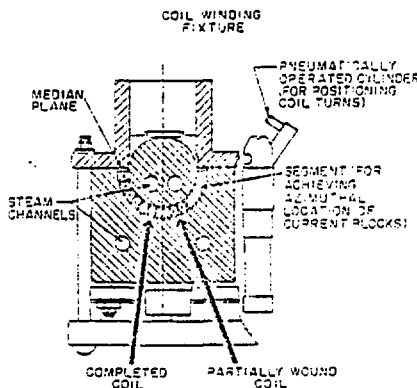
This is an end-view drawing (axial) of the steam heated, hydraulically loaded iron winding fixture used for the ISABELLE coils.
